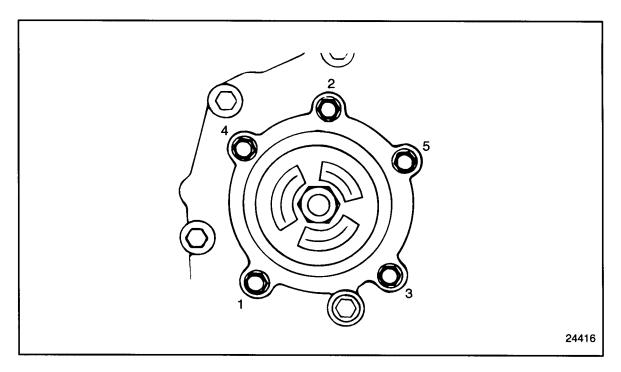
Accessory Drive Housing Bolt Torque Sequence
